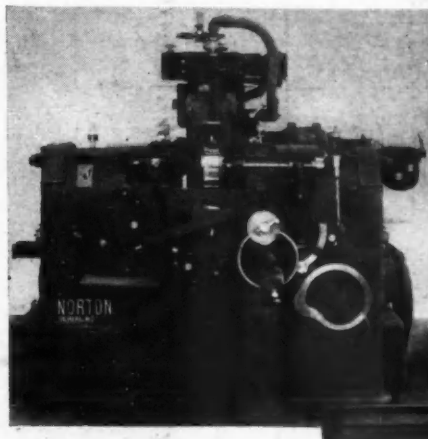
Grinding valve stem guides in full-automatic grinder, and Fig. 5 — Valve stem guide is shown at the lower right
